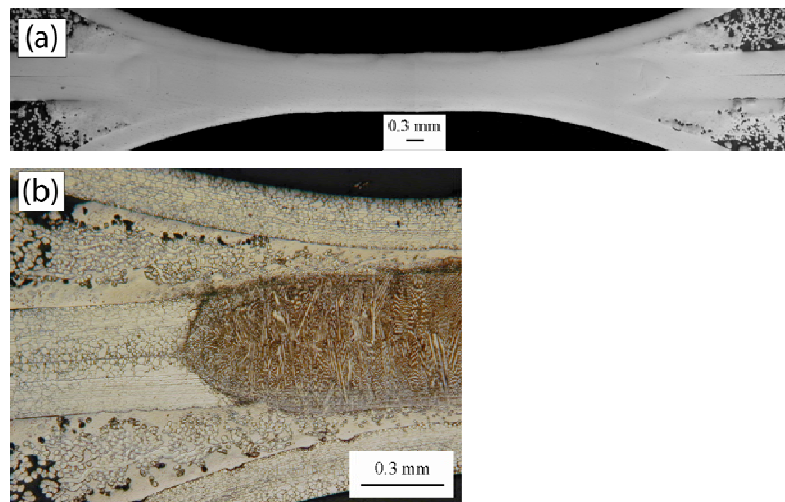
Optical micrographs depicting the transverse cross-sections of a welded pair of brazed long in-plane mesh sheets. (a) An as-polished complete section, and (b) higher magnification view of an etched weld nugget [26].
